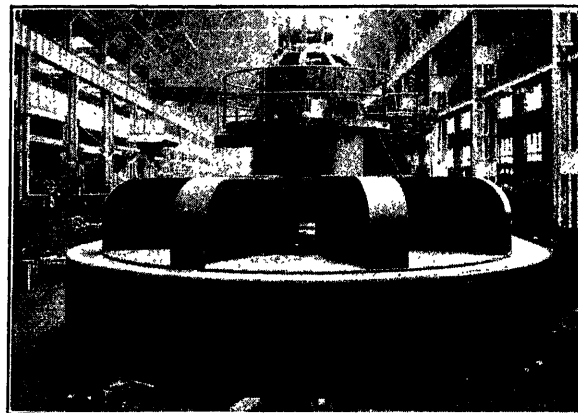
33,000-Kv-A. 125-REV. PER MIN. 6,600-VOLT-50-CYCLE GENERATOR WITH PRACTICALLY NO CASTINGS
